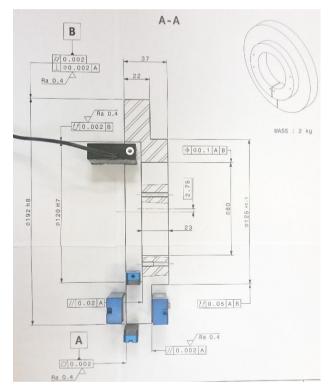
Photo of the technical drawing showing the positioning of the air pads (blue) and the piezo motor (black) as well as the tight tolerances linked to them on the ceramic rotor.
